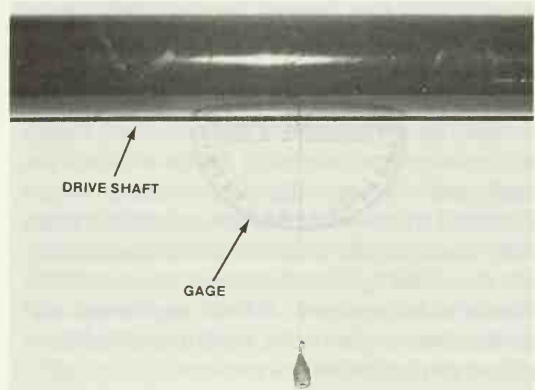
A protractor-type gage is used to measure drive shaft and universal-joint angles.
